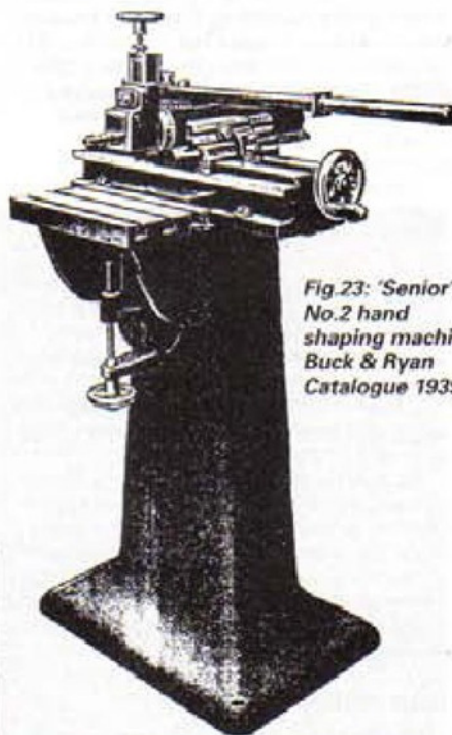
'Senior' No.2 hand shaping machine. Buck & Ryan Catalogue 1939.
